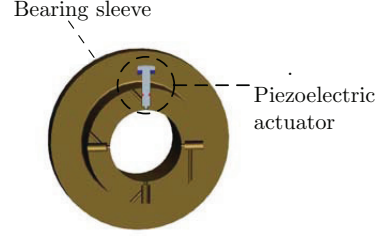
3D view of the piezoelectric injection system inside the bearing sleeve.
